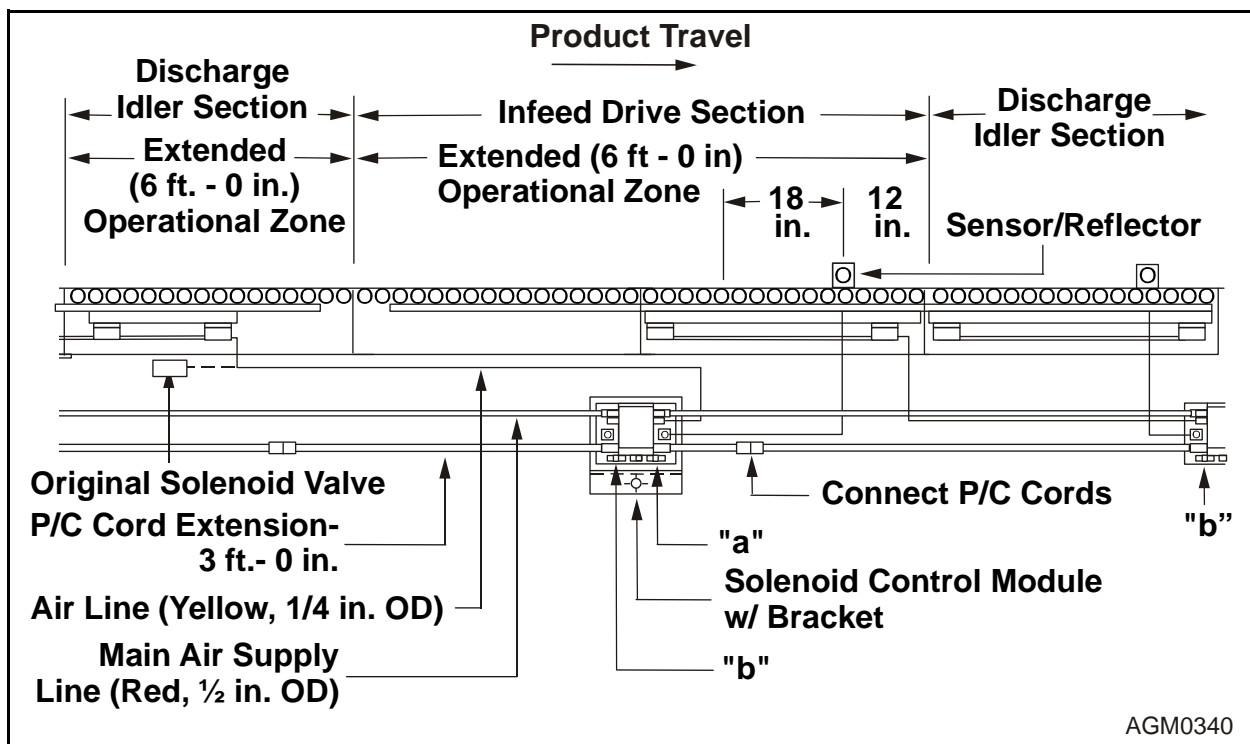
41 Connecting Two (2) Inline Conveyors
